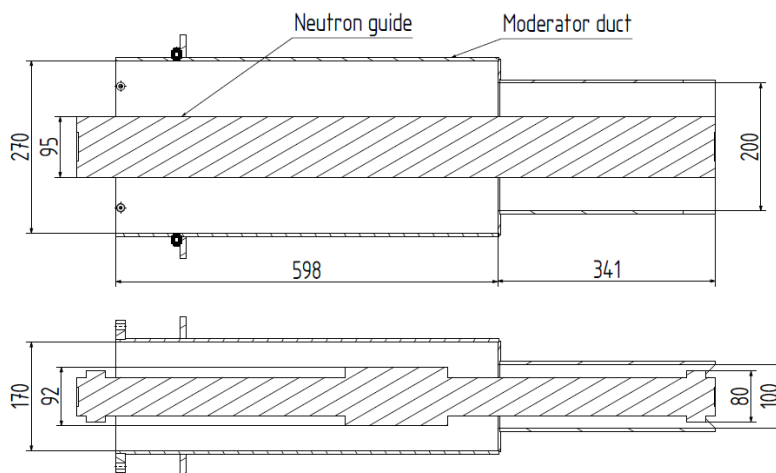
Cut side (a) and top (b) view of the moderator duct of the prototype TMR including existing neutron guide. The guide's maximum outer dimensions of $H = 95 \text{ mm}$ and $W = 92 \text{ mm}$ are significantly larger than the inner dimensions to ensure a sufficient stability for an internal vacuum.
